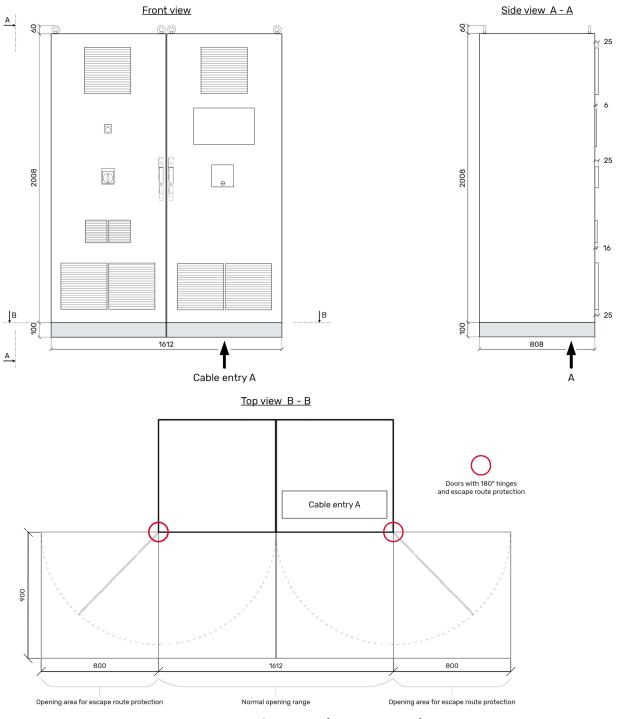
Control cabinet dimensions and position of cable entry (dimensions in mm)
